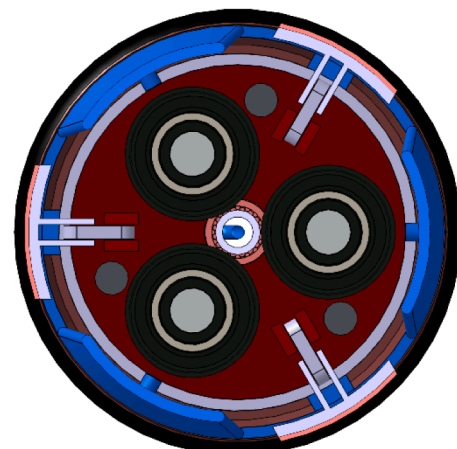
Section of the cutting system with the three motors in a 120° configuration.
